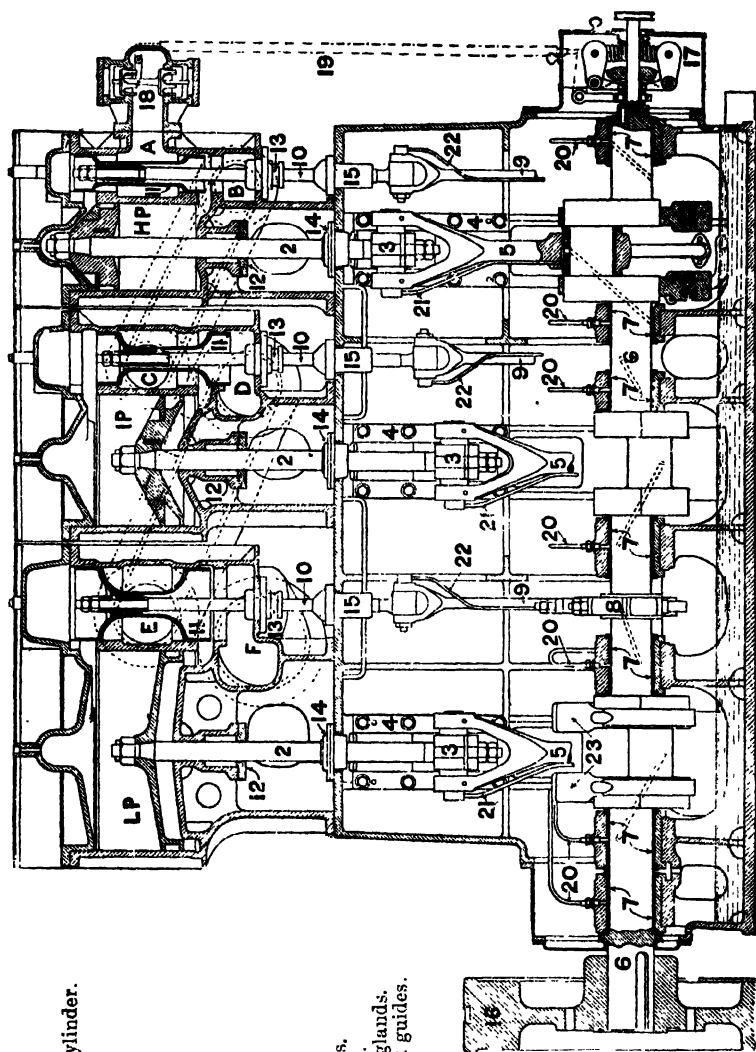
Allen high-speed enclosed triple-expansion engine.
